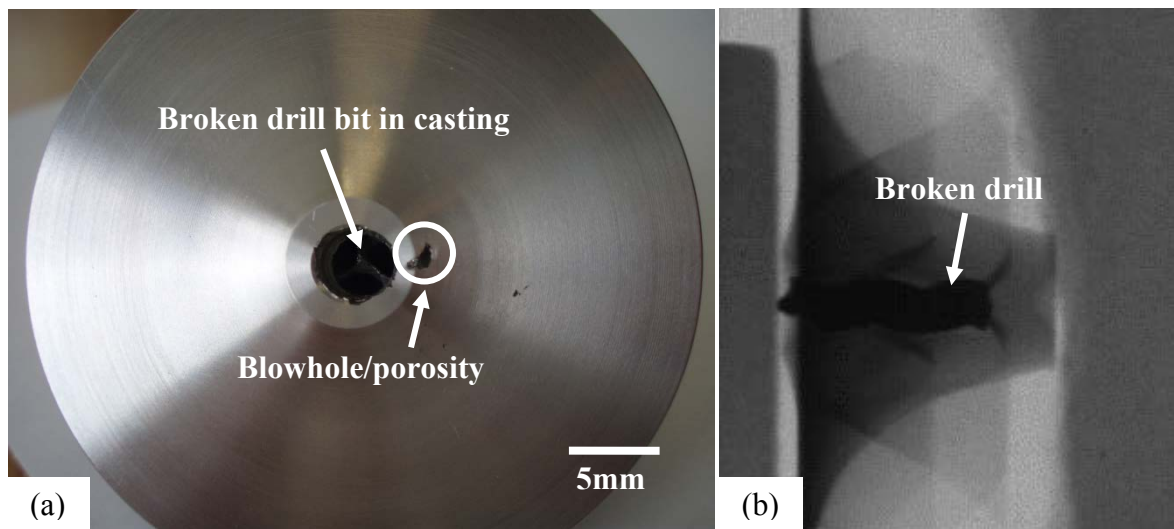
Photograph of (a) defect in material casting and (b) X-ray image of broken drill
